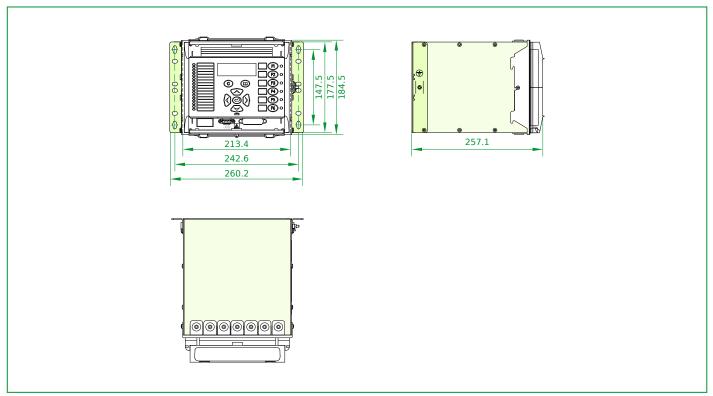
Surface-mounted 40 TE case. (Dimensions in mm.)
